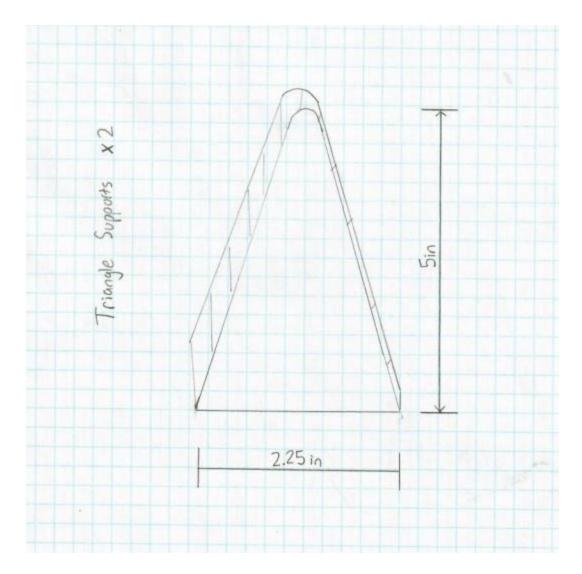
The sketch and dimensions of the triangle supports at the bottom of the ramp
